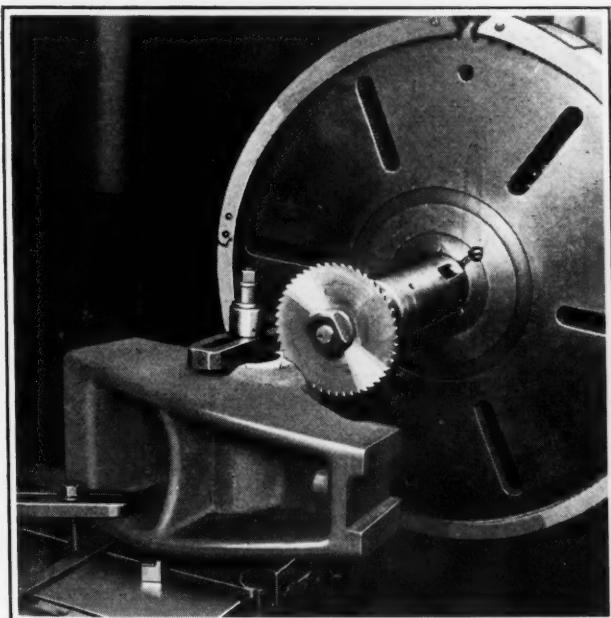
Splitting the Bearing of a Cast-iron Arm
